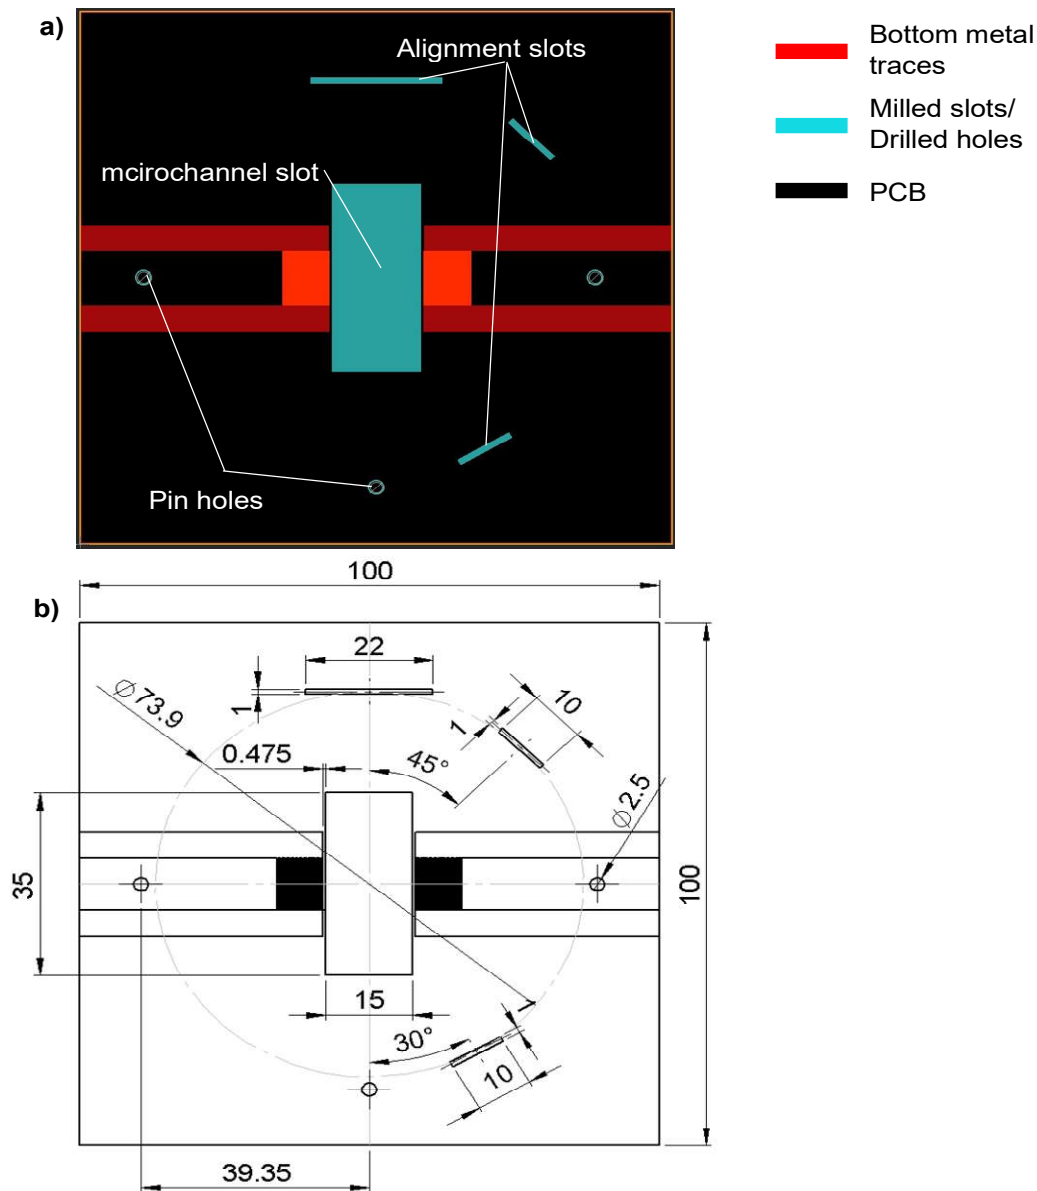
PCB IDT design. a) The Eagle design of the PCB IDT and b) the dimensions of the PCB IDT and its features.
